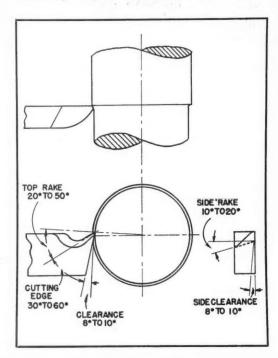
Drawing Showing Recommended Rake Angles for Aluminum Cutting Lathe Tools
